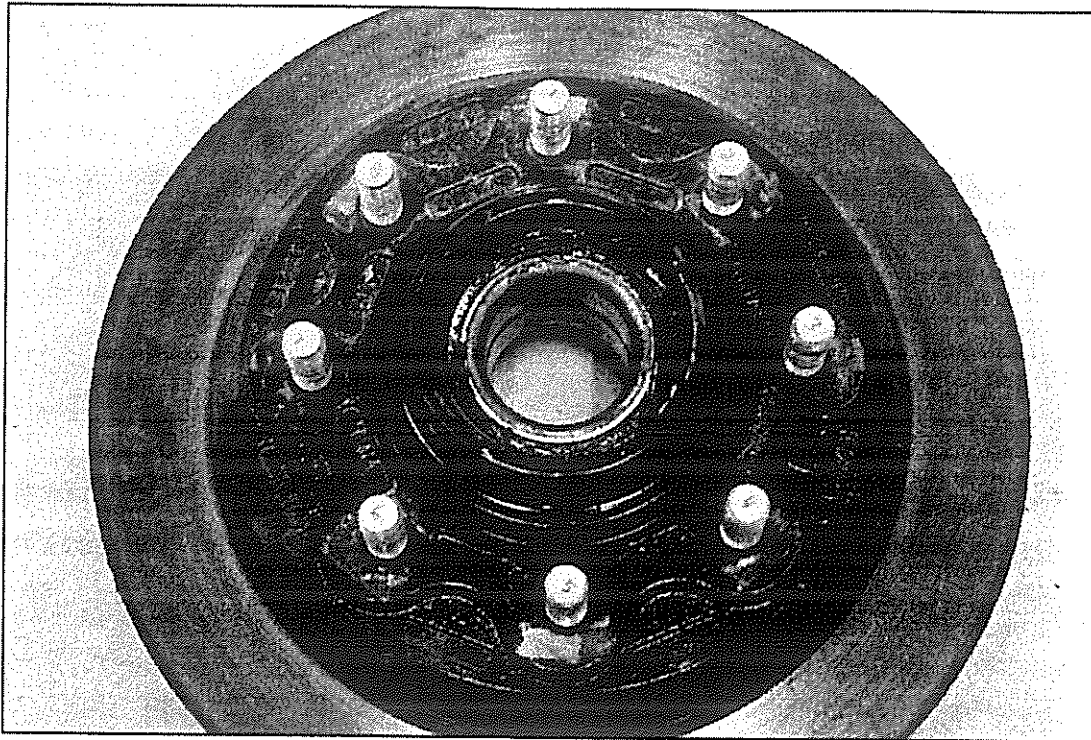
Left front rotor showing wear on the hub mounting face in the inboard and outboard areas adjacent to the wheel bolt
